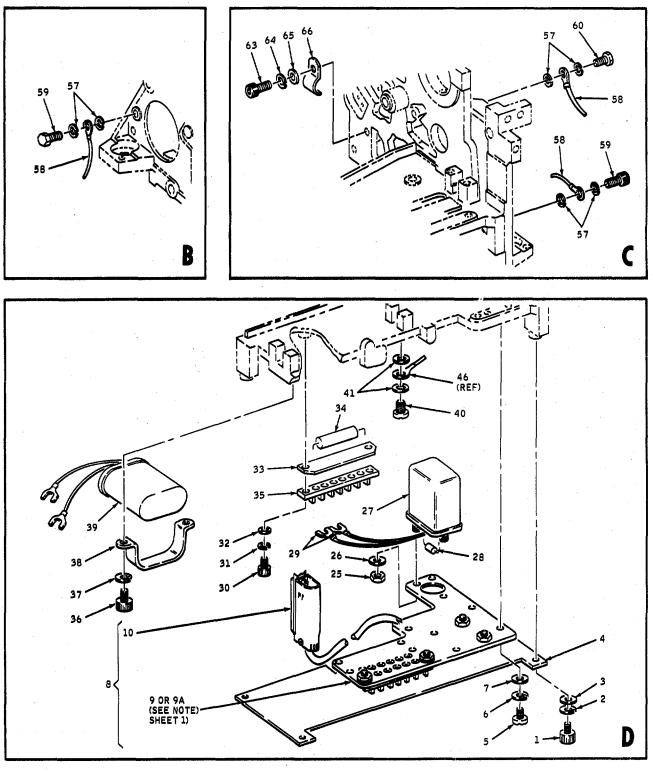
Printer Chassis Electrical and Base Mounting Components, Exploded View (Sheet 1 of 3)
